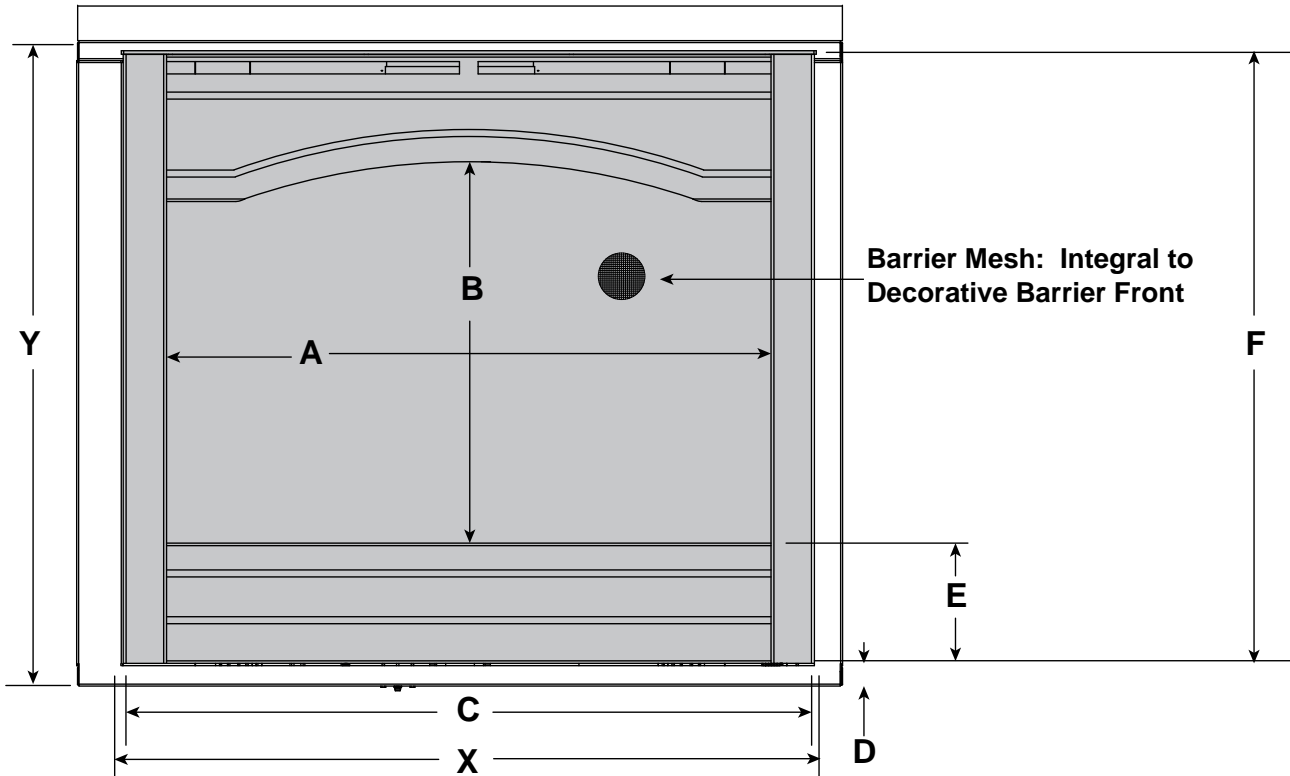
Decorative Barrier Front Dimensions - Chateau Forge
